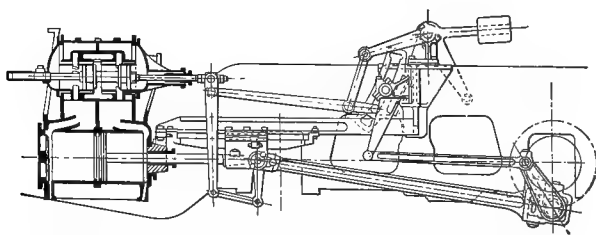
Walschaert's locomotive valve-gear crank-pin arm.
